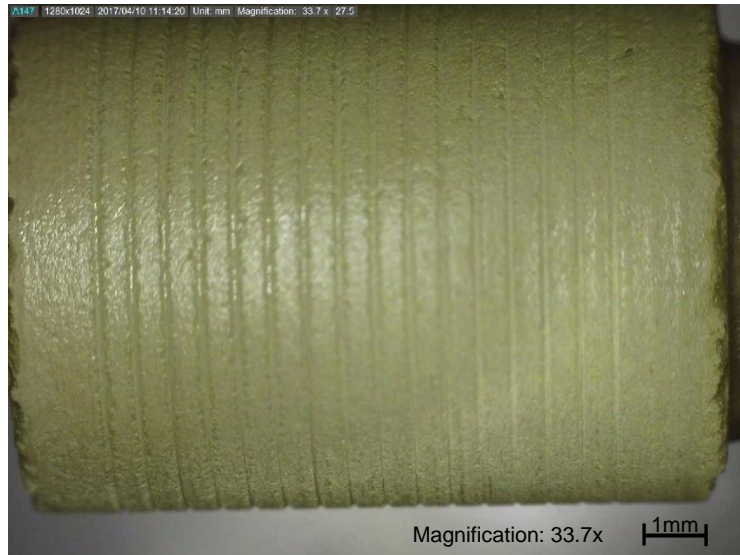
Grinding wheel dressed with 16 radial grooves
